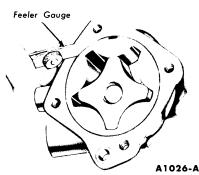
Outer Race to Housing Clearance—Typical Oil Pump
